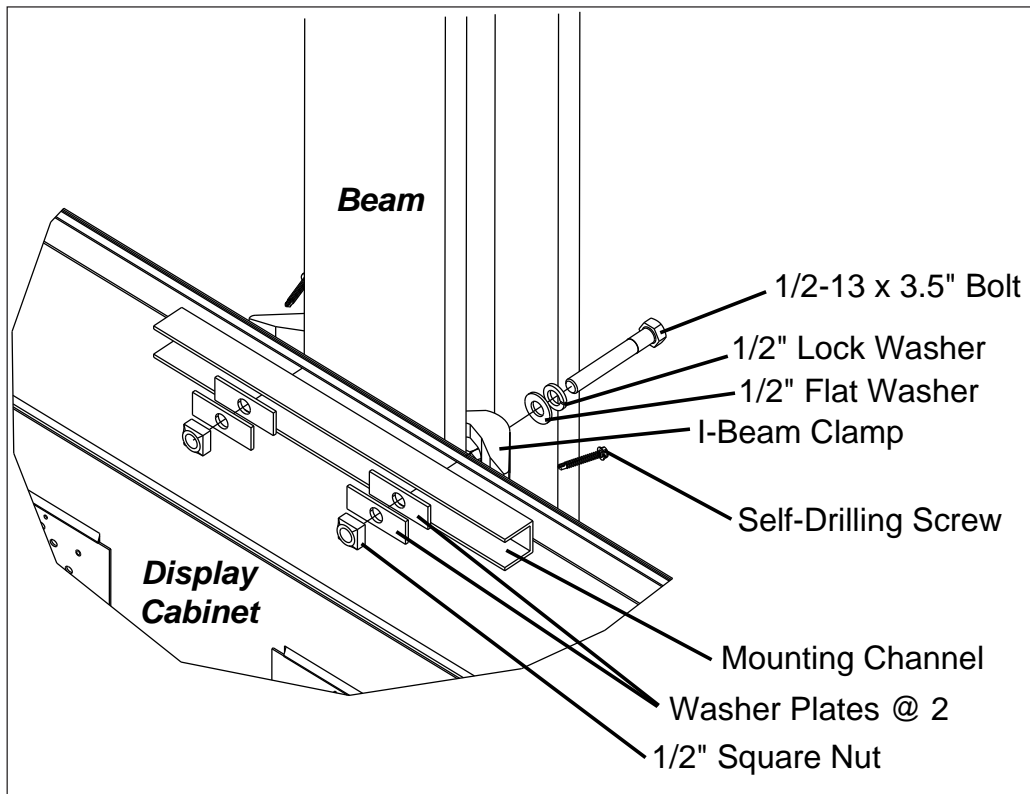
I-Beam Clamp Mounting, Front Rotated View
